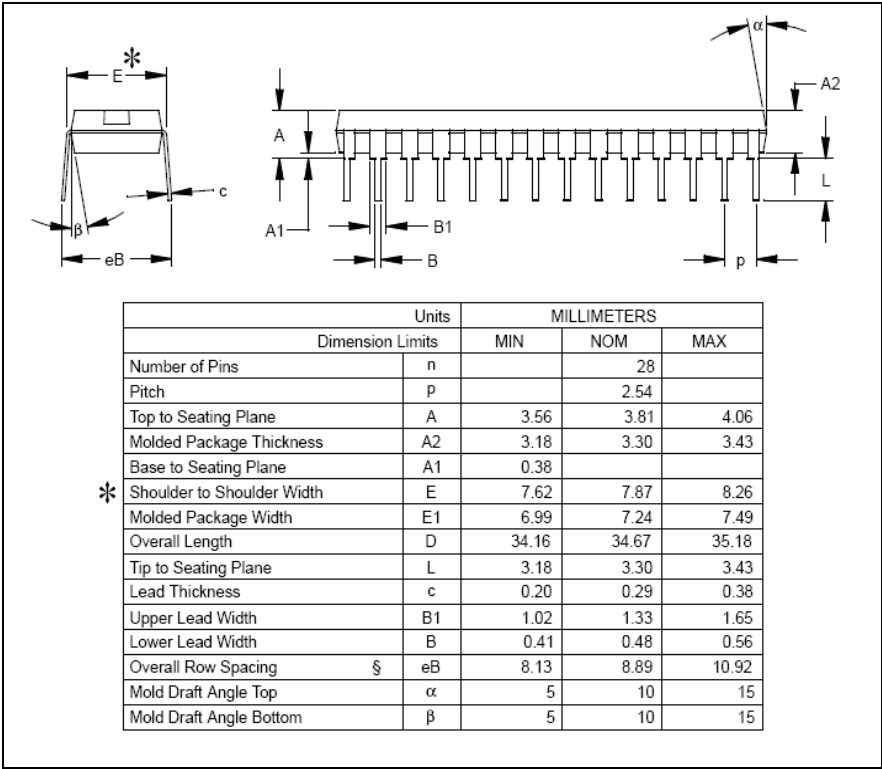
Dimensions for a PIC16F73-I/SP microcontroller. Note \* dimension.
